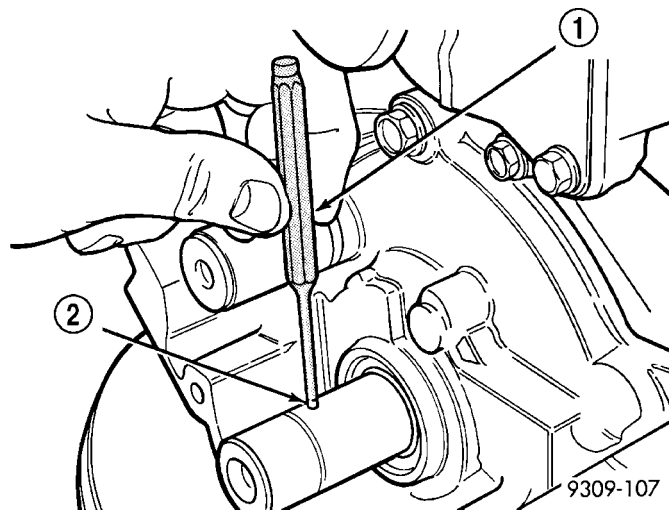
Crankshaft Dowel Pin - Removal/Installation
